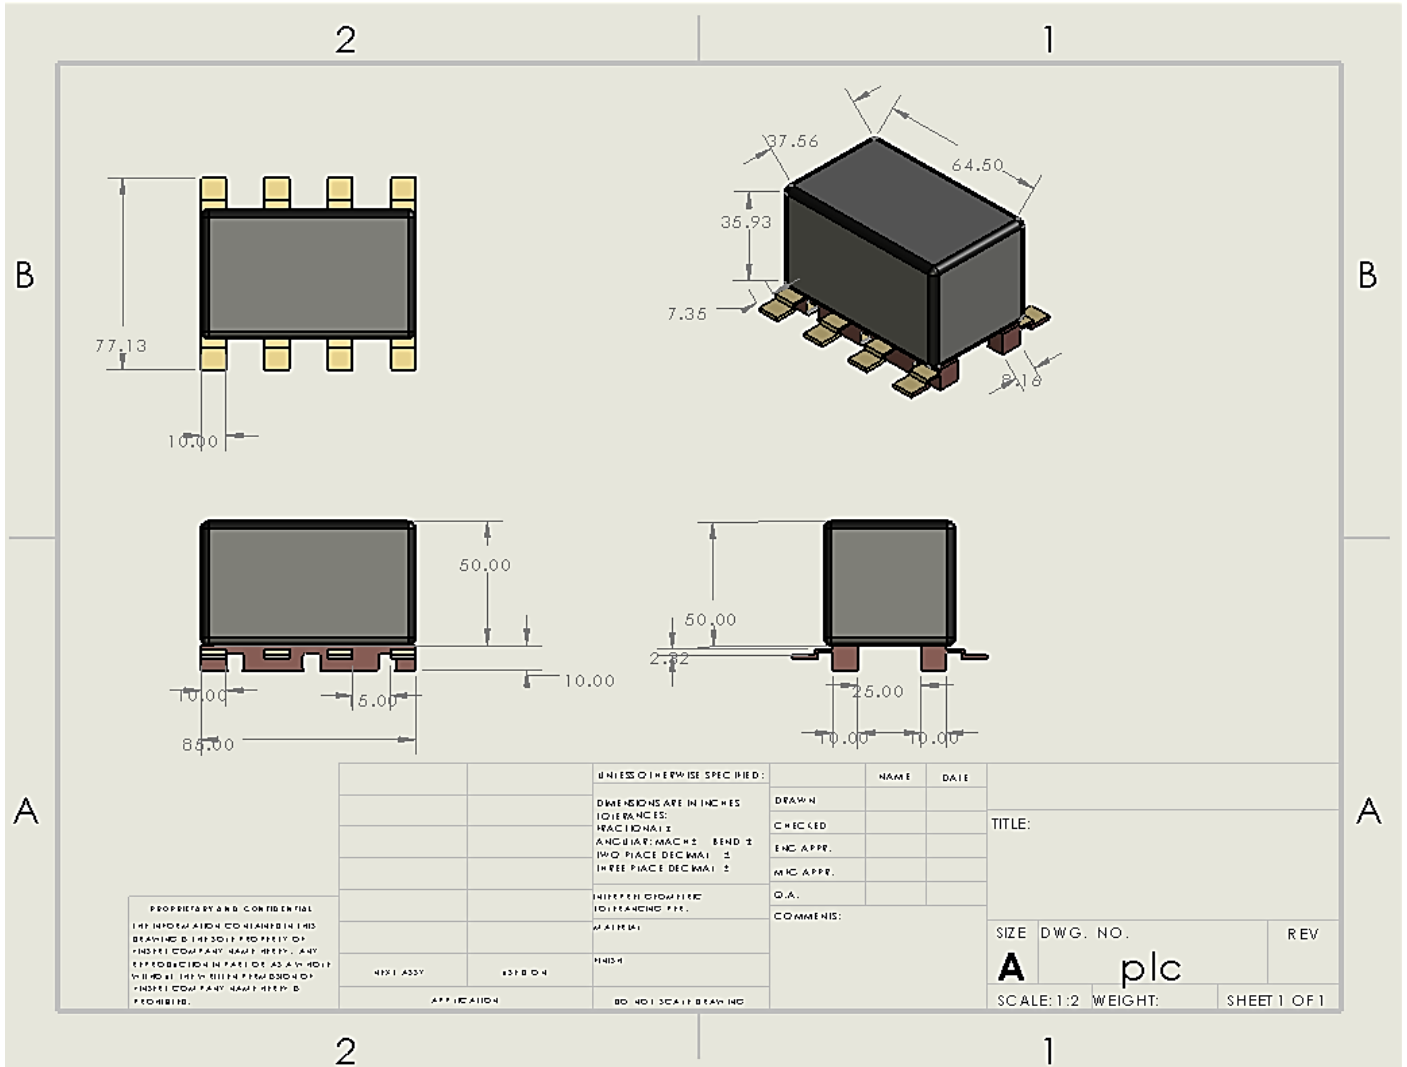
Drawing of Programmable logic controller with dimensions (mm)
